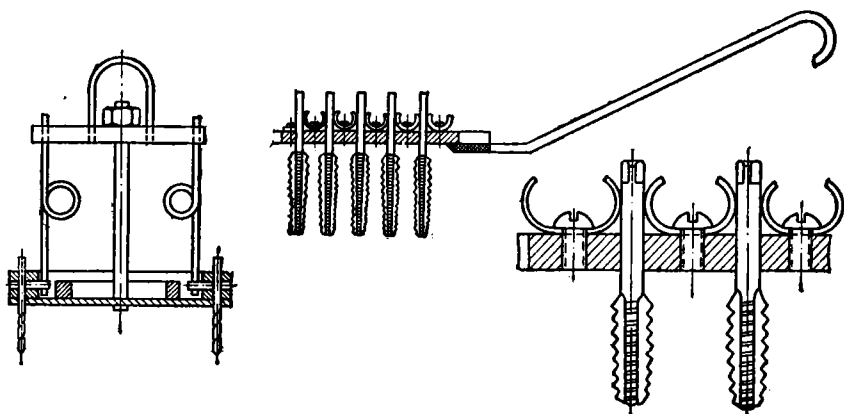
Multi-seated fixtures for quenching small-size, slim tools (bits, screw taps, etc.).
